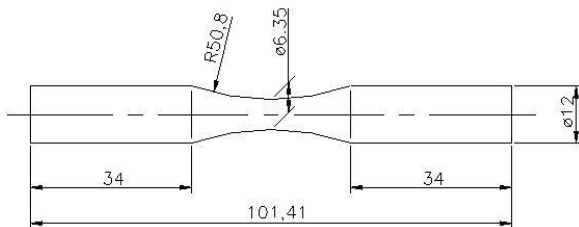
Specimen geometry for biaxial cyclic tension-compression with cyclic torsion tests [8].
